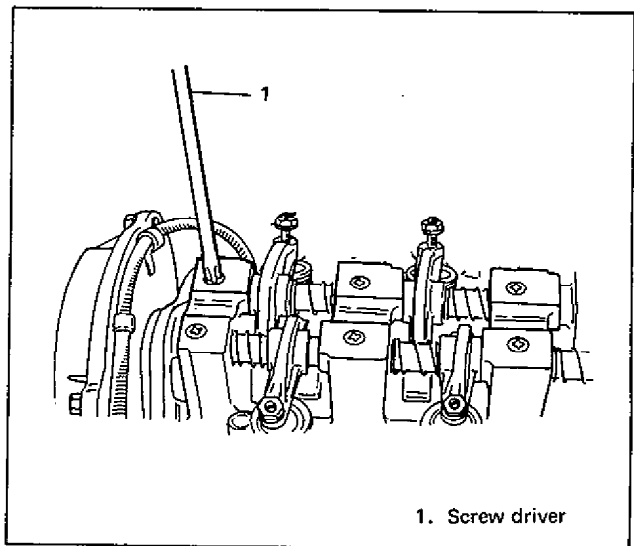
A-61 Rocker Arm Shaft Screws Removal
